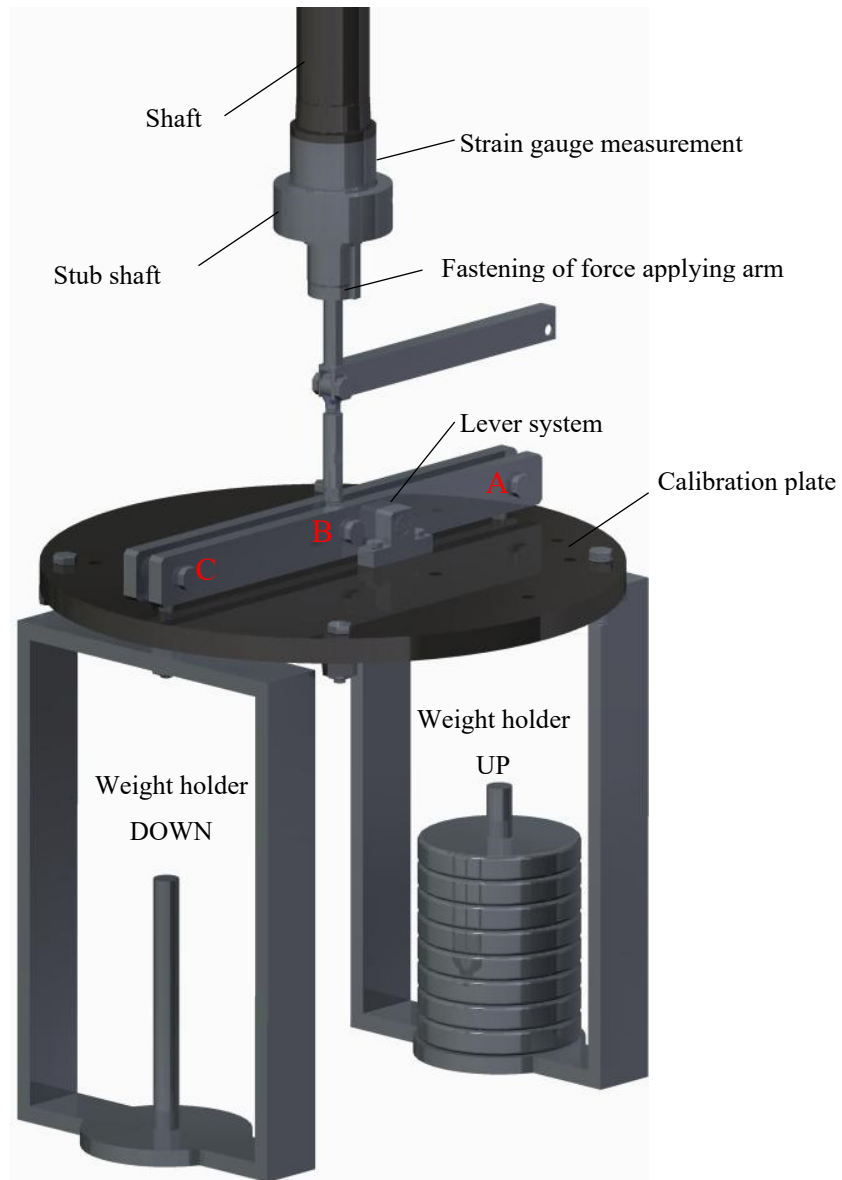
TTL Jig for Axial Load Calibration of Upward Force; 3D View
